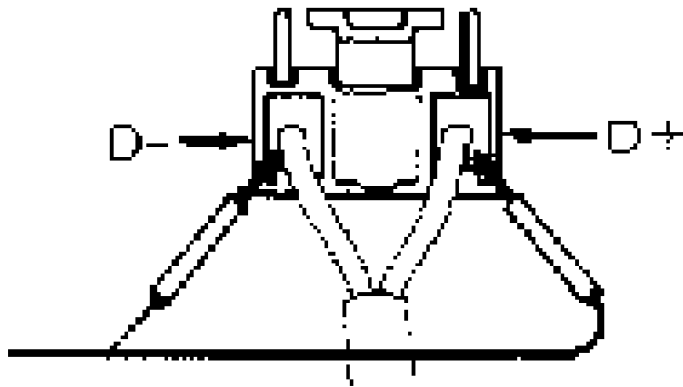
Spiral Cable-To-Steering Wheel Pad Connector Terminal ID
